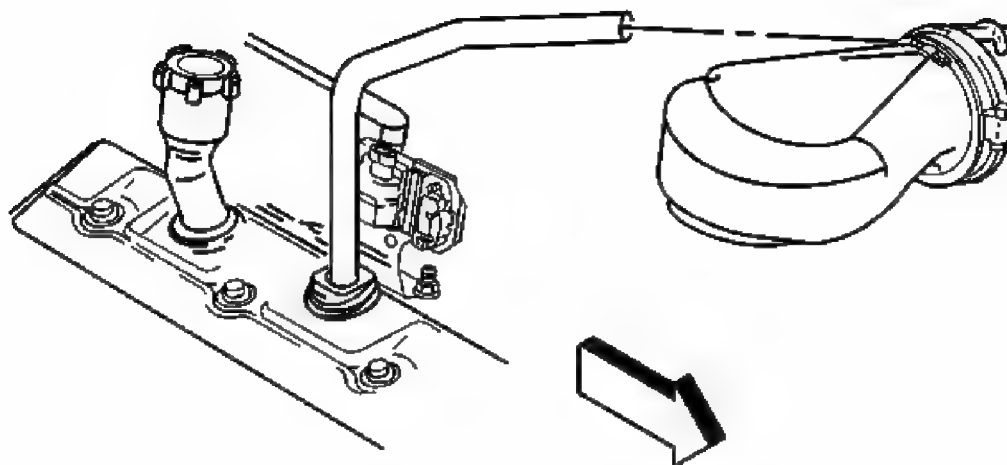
View Of Breather Tube At Air Cleaner Outlet Duct
